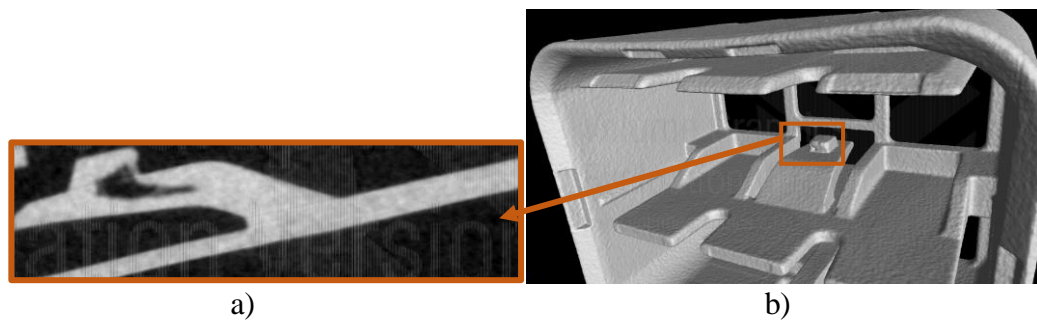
Irregularity on injection moulded component gained by CT, a) 2D section view, b) location on component
